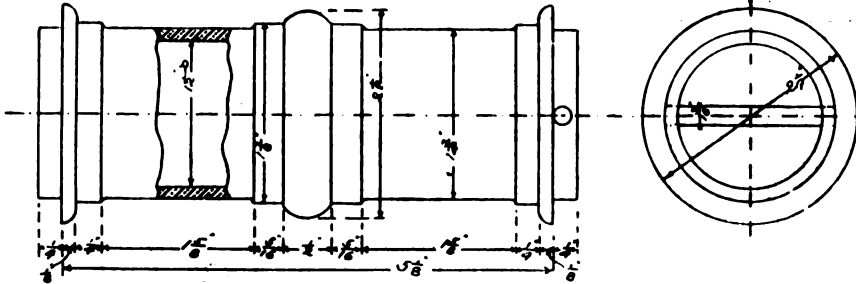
DETAILS OF SMALL POWER THREE-THROW DEEP WELL PUMP.
